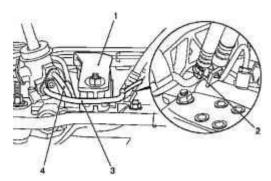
Removing the front suspension subframe: 1 - bracket damping engine block, 2 - holder, 3 - supply pipeline, 4 - reusable tube
